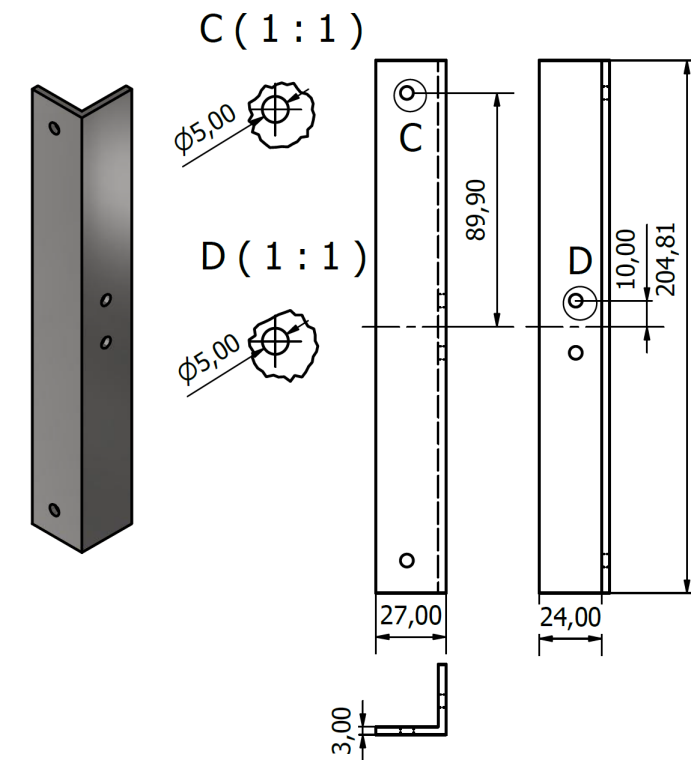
L-shaped bearings diagram in millimeters of the Fixing Structure.
